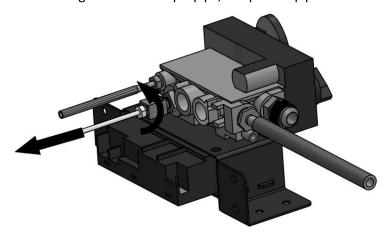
Exploded View of Pilot Parts, Receiver and Gas Valve
